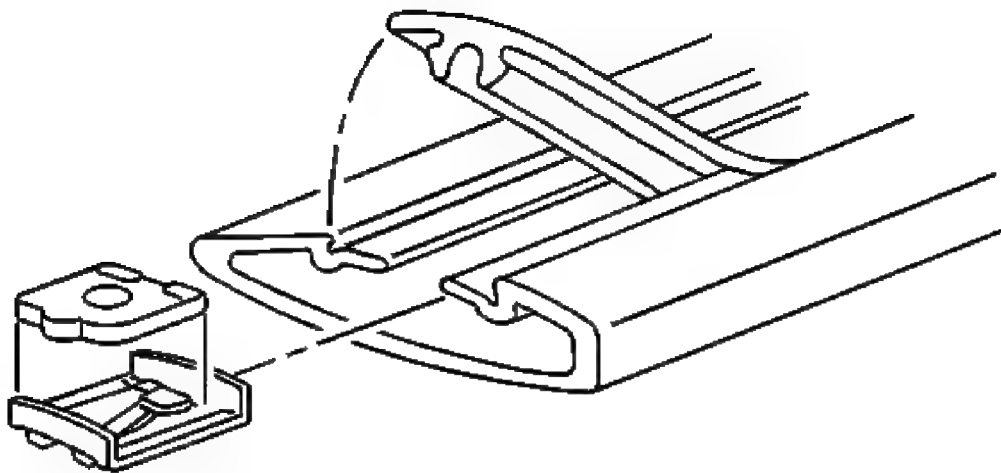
View Of Rubber Strip For Cross Bar Assemblies
